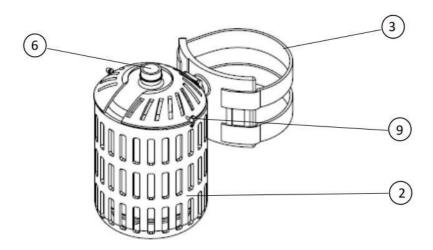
Perspective view of wearable modular chest tube carrying apparatus for lowerextremities
